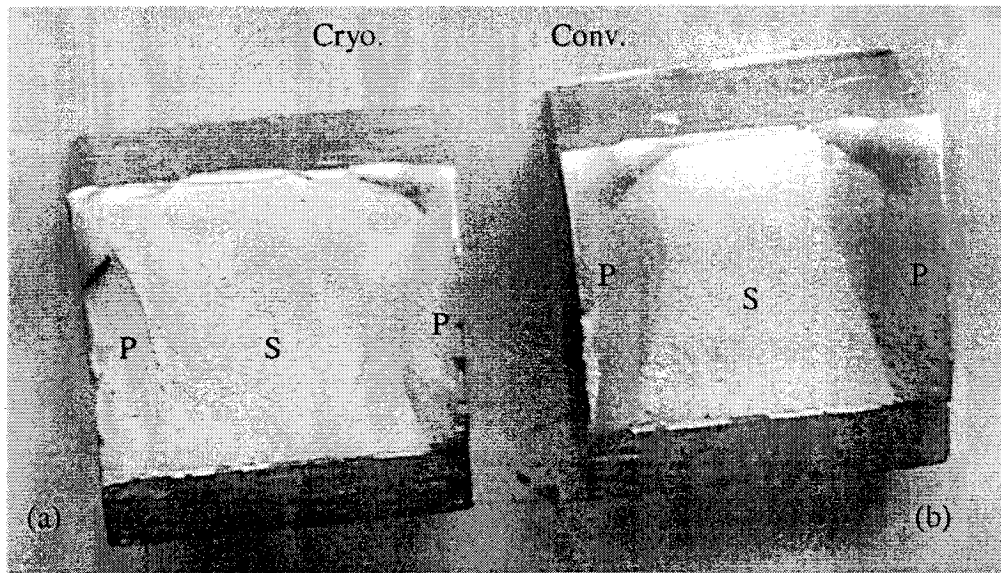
the view of Charpy fracture surface of 4340 steel heat treated (a) Cryogenically (b) Conventionally, "P" and "S" regions are shown.
